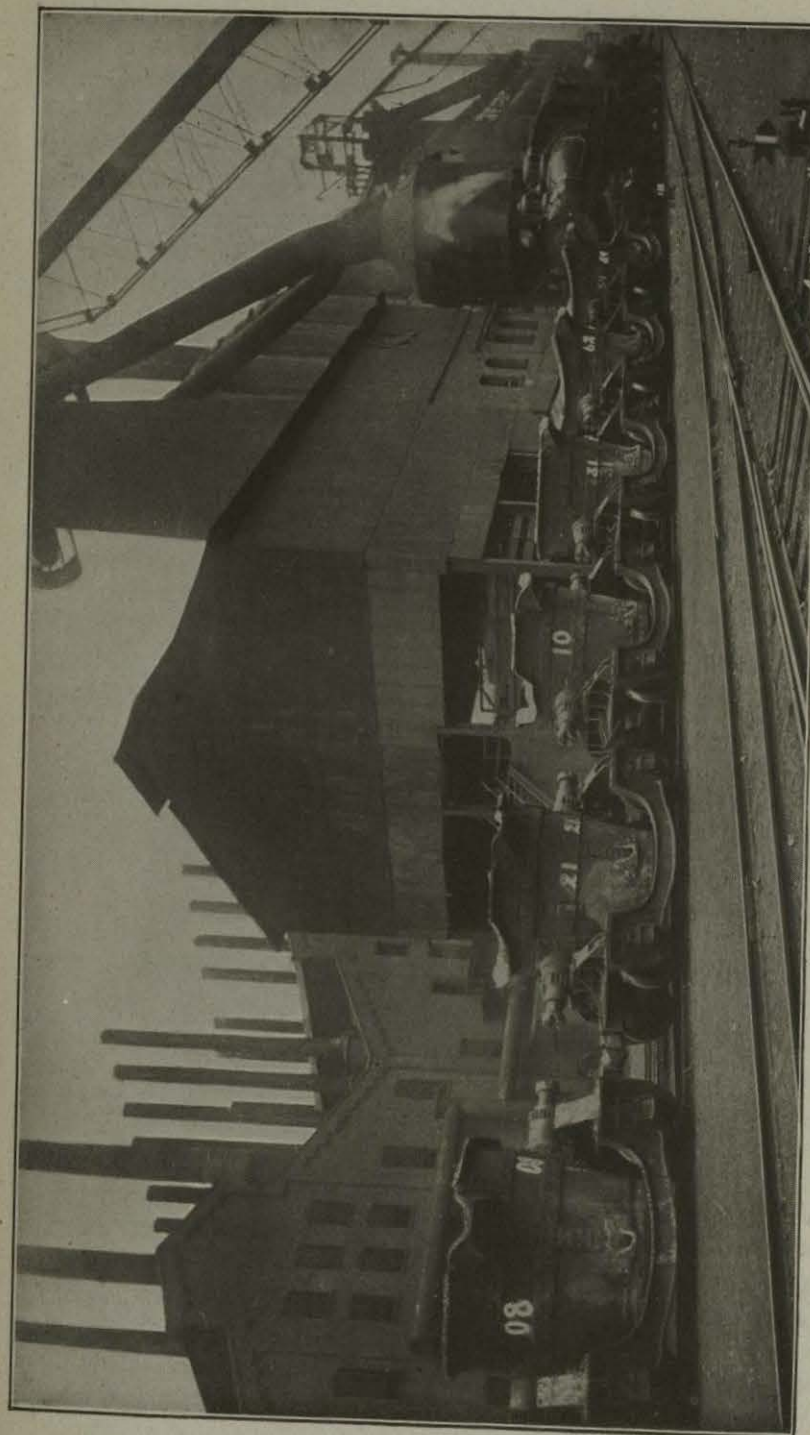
"Hot metal" ladle cars carrying molten cast iron to steel converters.
